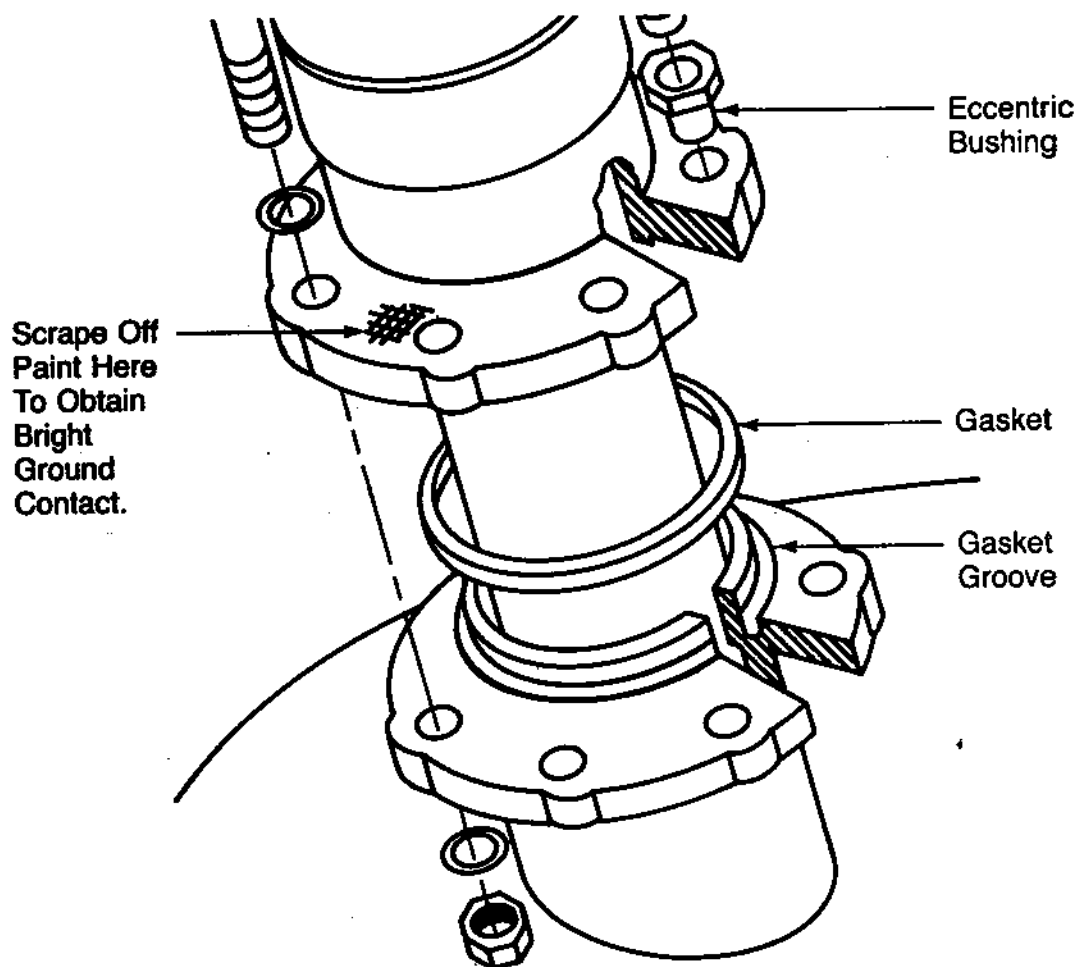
Installation of a Bushing on a Circuit Breaker
